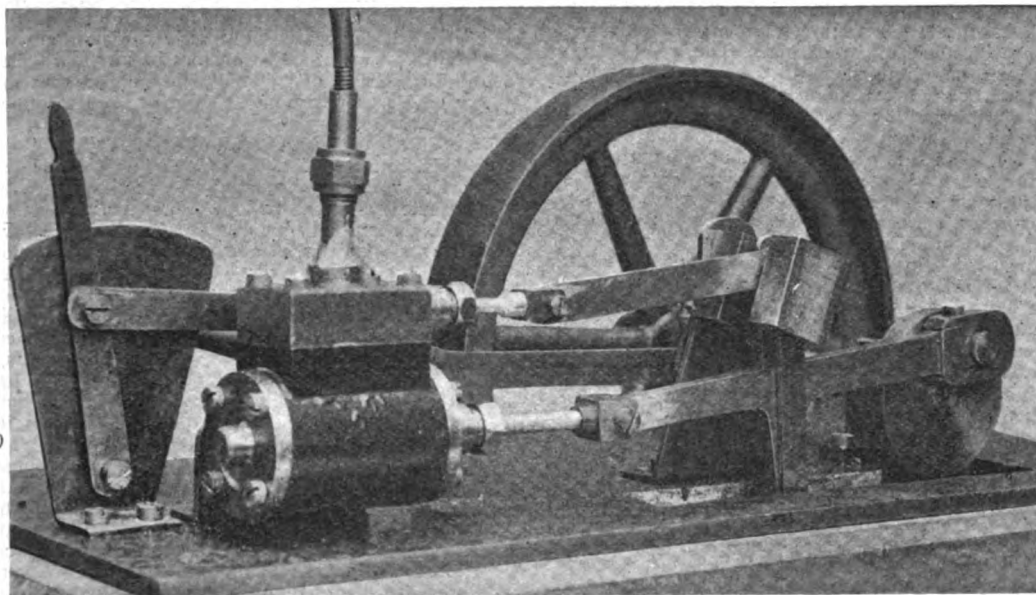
FRONT VIEW OF AN EXPERIMENTAL HORIZONTAL ENGINE FITTED WITH NEW MODEL VALVE GEAR.
